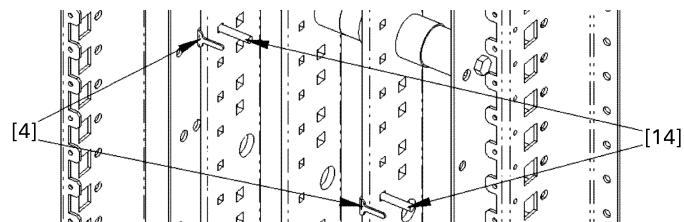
Installing carriage bolt assemblies on phases A and C, isometric view.
